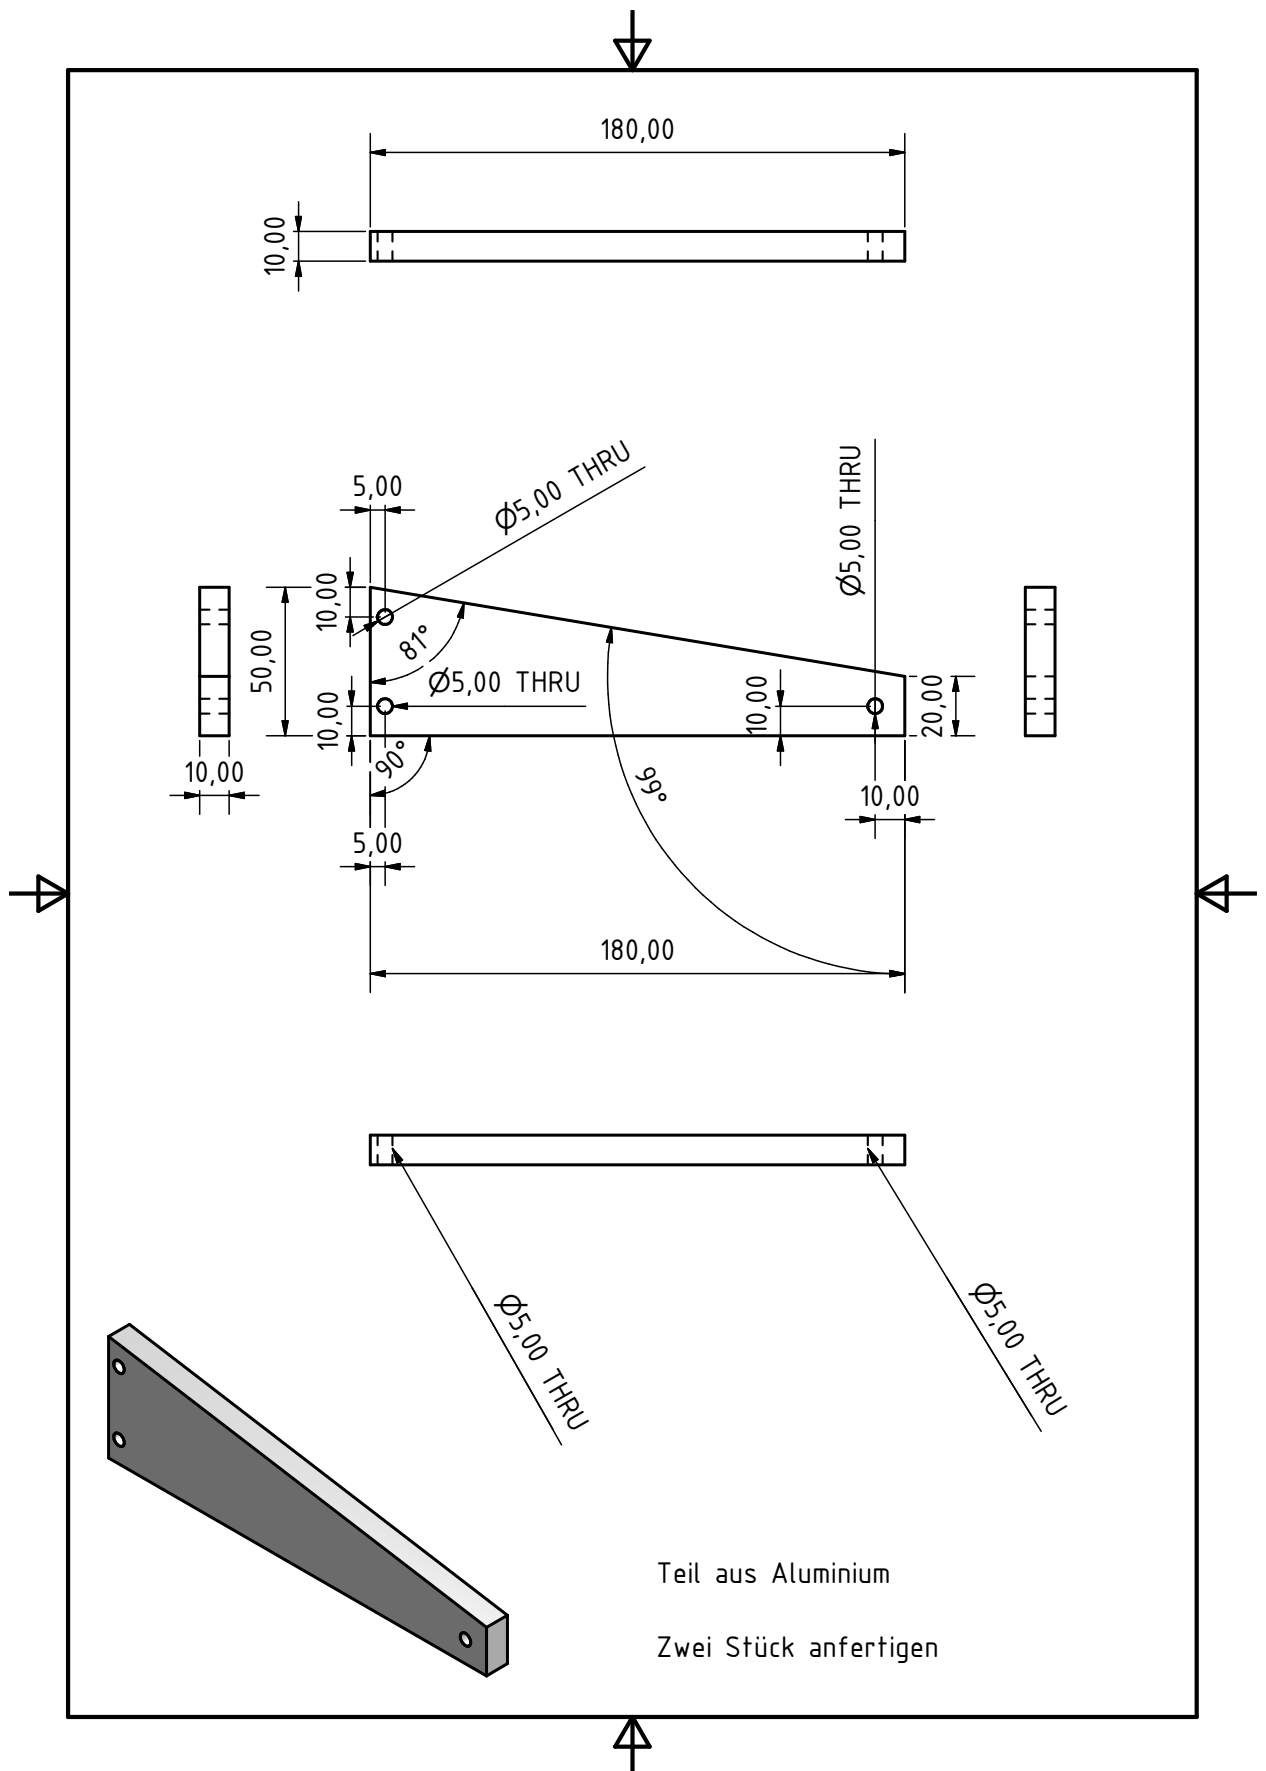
CAD sketch of third part of detector tilting mechanism. Connection parts between these three parts, such as bushes are not sketched, but have been placed in by the workshop.
